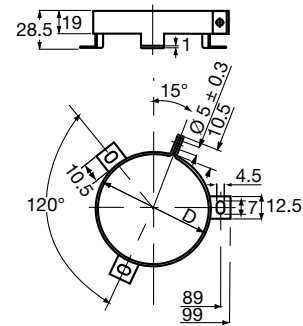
Dimensional outline of clamp for case Ø D = 76 mm
